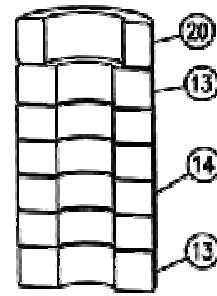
Molded Graphite Ribbon Packing Kit P/N 24492T001
